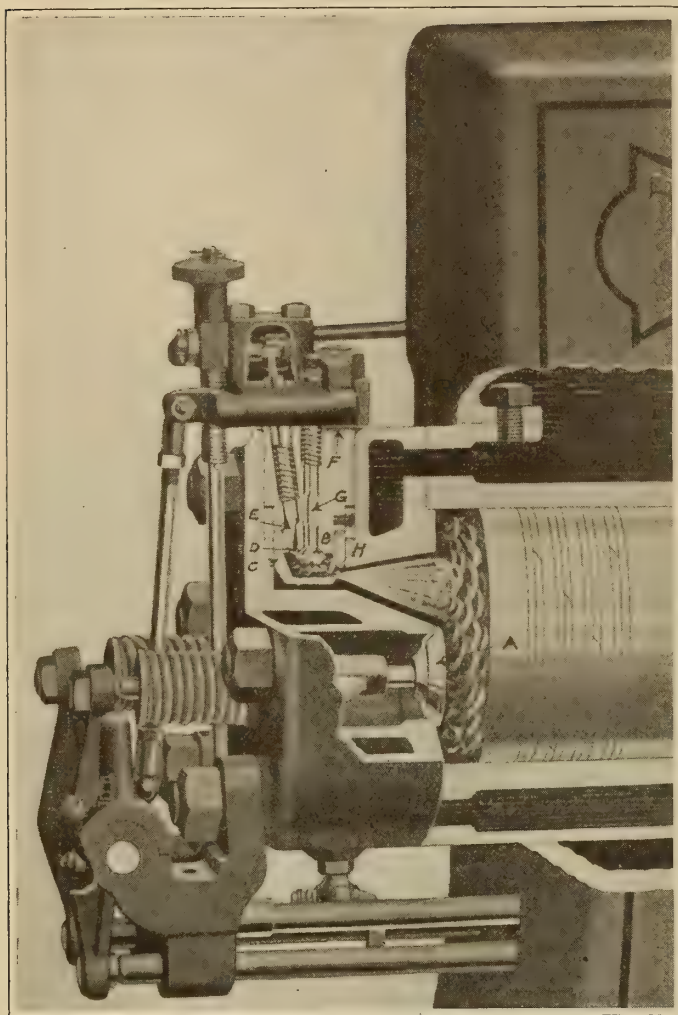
CUTAWAY SECTION OF 8 H.P. HVID-TYPE FARM ENGINE
